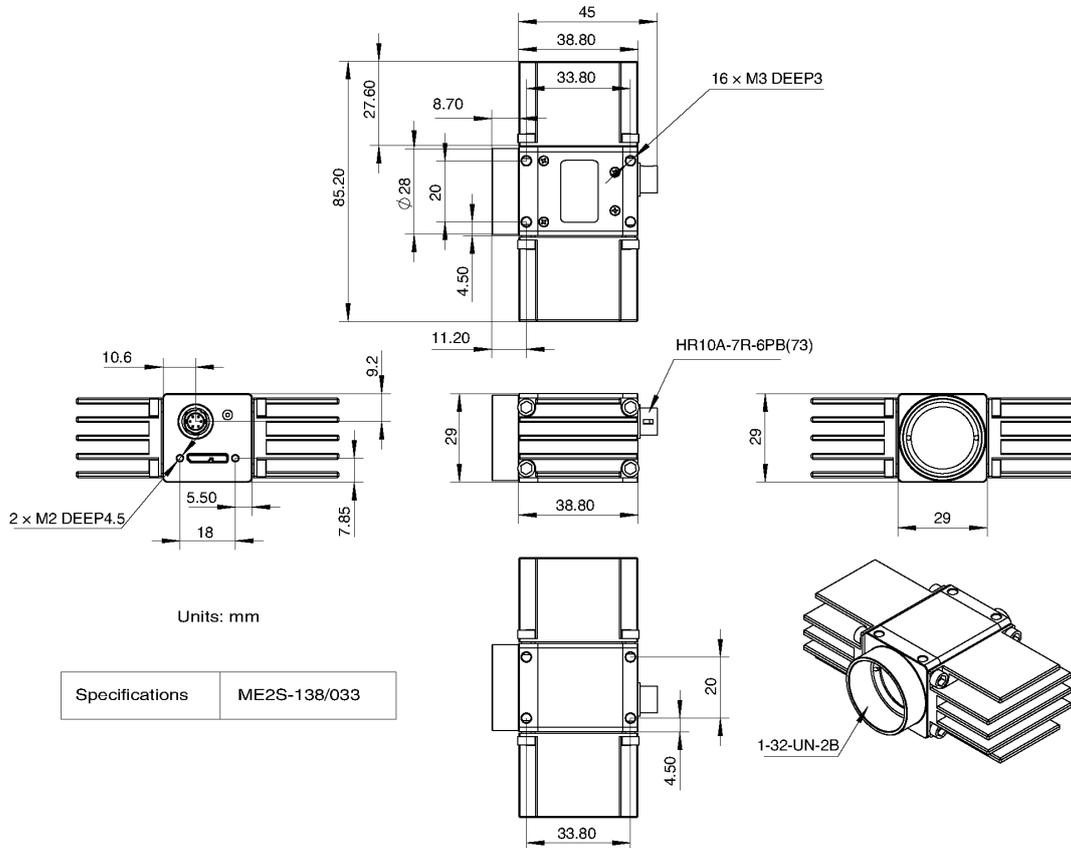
ME2S-U3 mechanical dimensions (With Heat Dissipation Fins)
